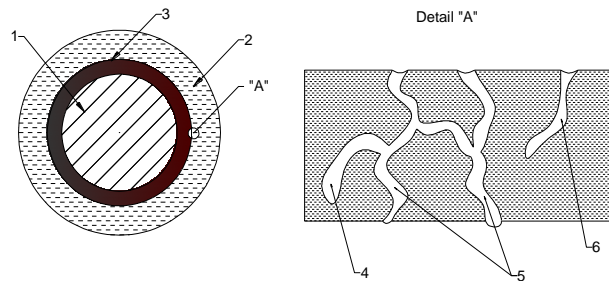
Diagram of the porous slide bearings: 1 - pin, 2 - porous bearing shell, 3 - lubricant in the bearing shell material, 4 - dead-end branch, 5 - open through pores, 6 - one-sidedly open pore
